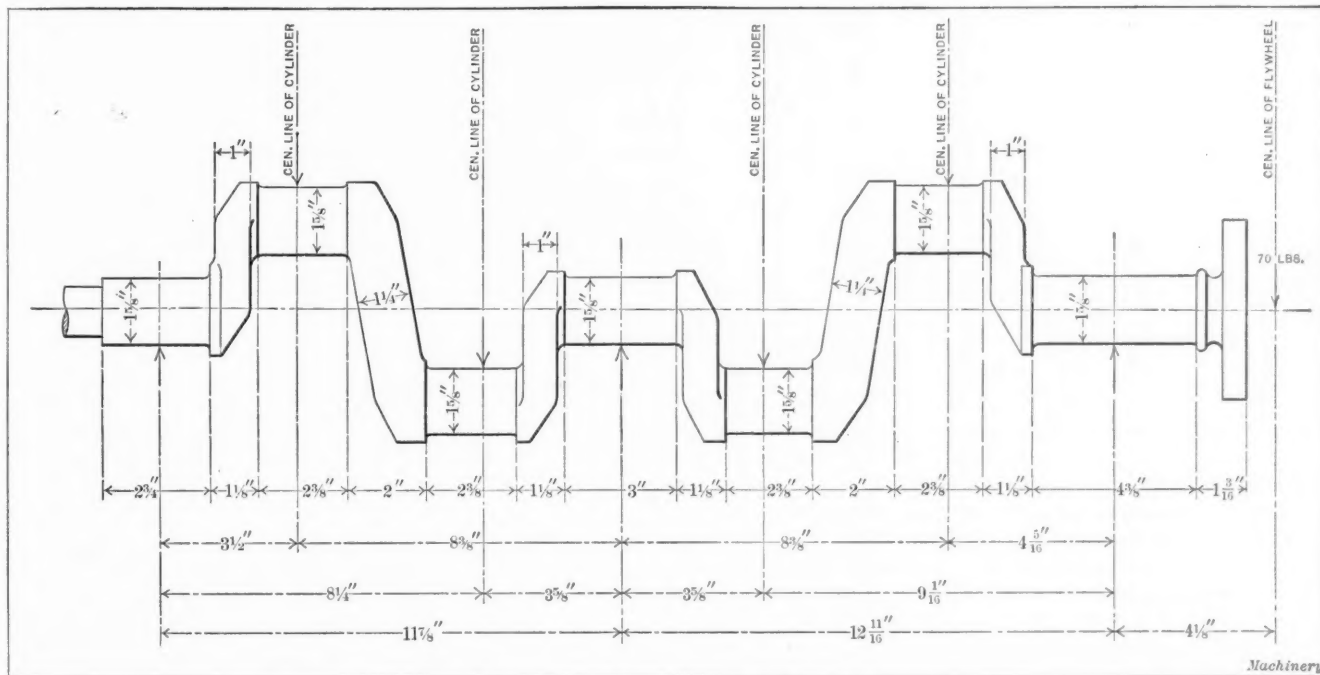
Four-cylinder, Three-bearing Crankshaft
